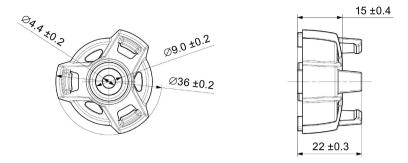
Dimension drawing of spacer 6GT2690-0AK00
